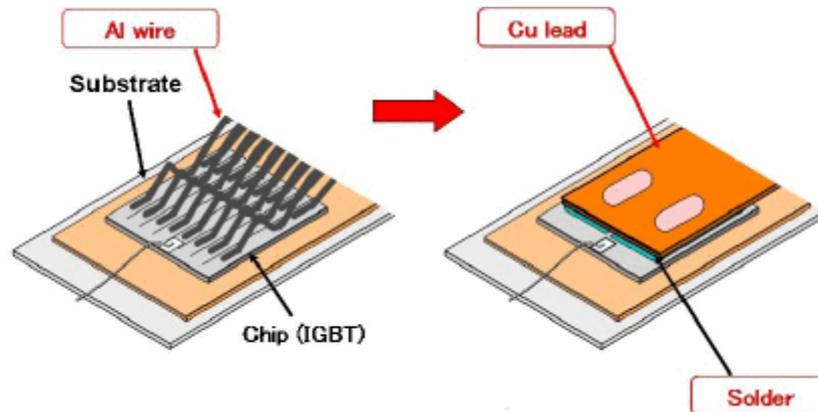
Cu lead of Transfer-molded power module [22].
